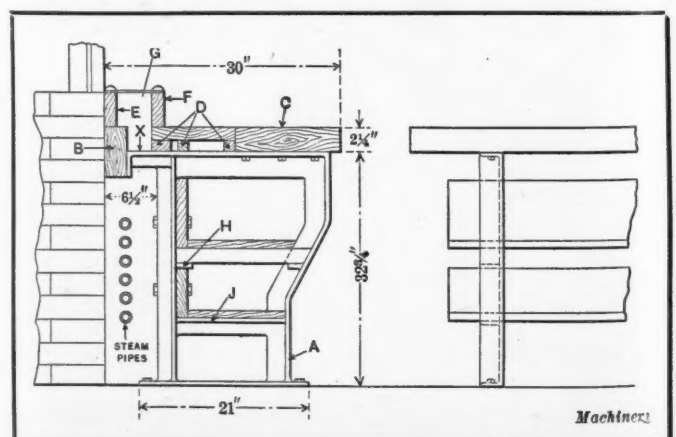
Method of holding Bench shown in Fig. 6 in Position
